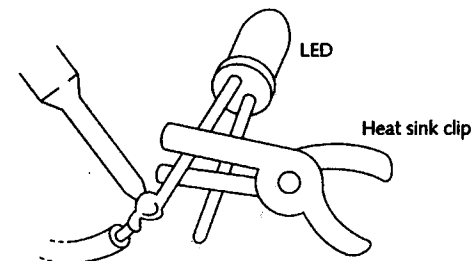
Heat sink goes between soldering iron tip and component.
